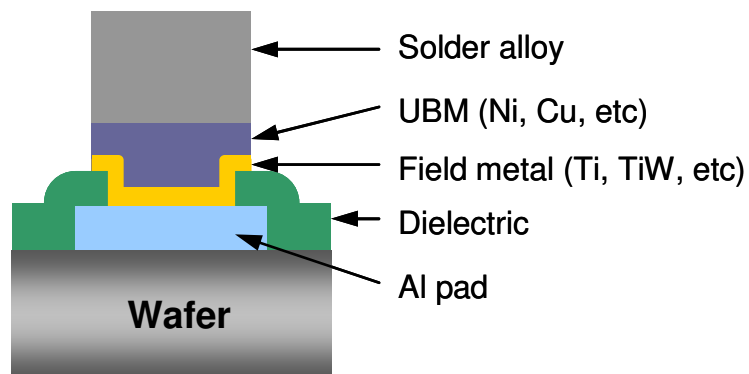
Diagram of a solder bump stack after wafer bumping process
